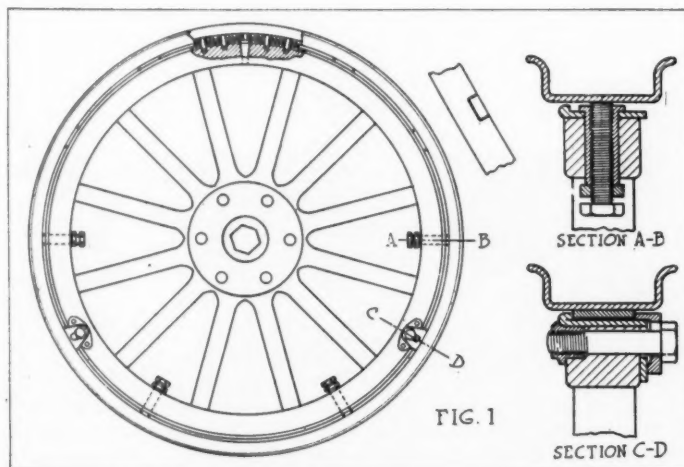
Elements of Parker patent on demountable rim construction. Fig. 2—Improved design of the Parker steel wheel recently patented
